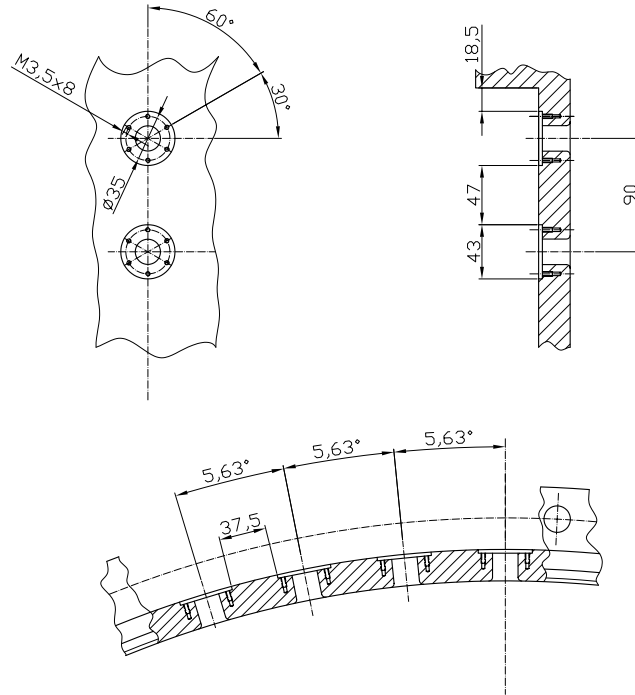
Housings for the HN88C connectors assembly on the outer ring of the collector (dimensions in mm).
